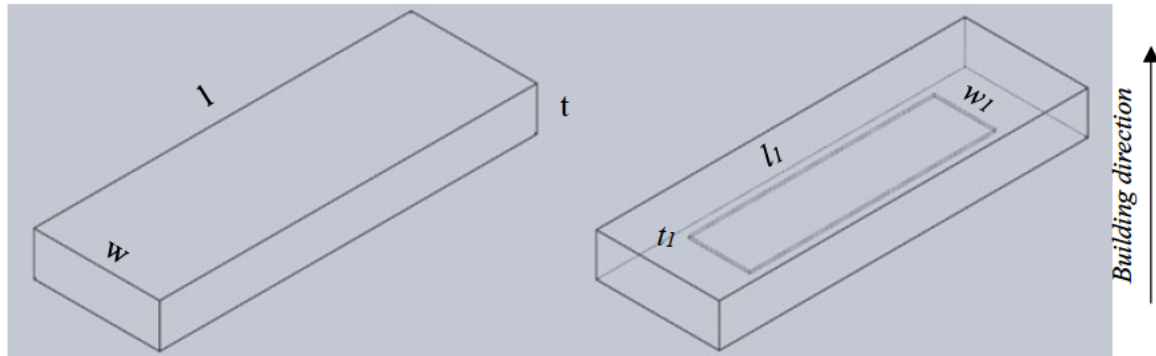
Outline of CAD drawing of samples without (left) and with defect (right)
